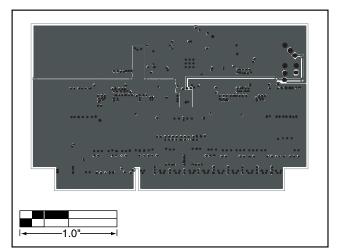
MAX5037 EV Kit PC Board Layout—Inner Layer 2
